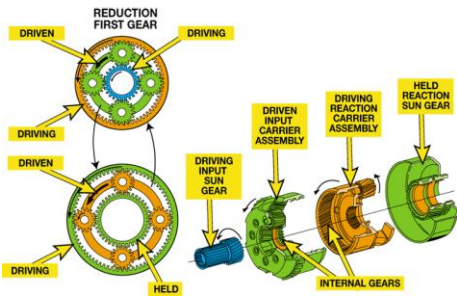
A typical planetary gear set showing the planet carrier which supports all of the pinion gears (also called planet pinion gears).
